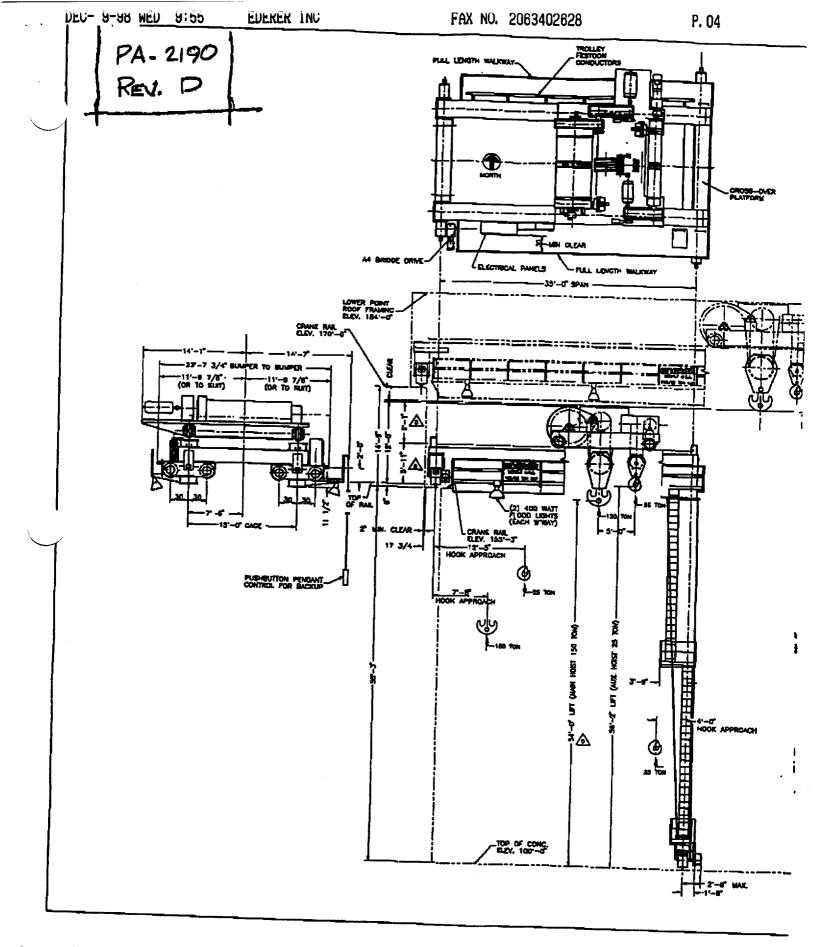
Final Dimensioning for Clearance Drawing PA-2190, Revision D 5-4
